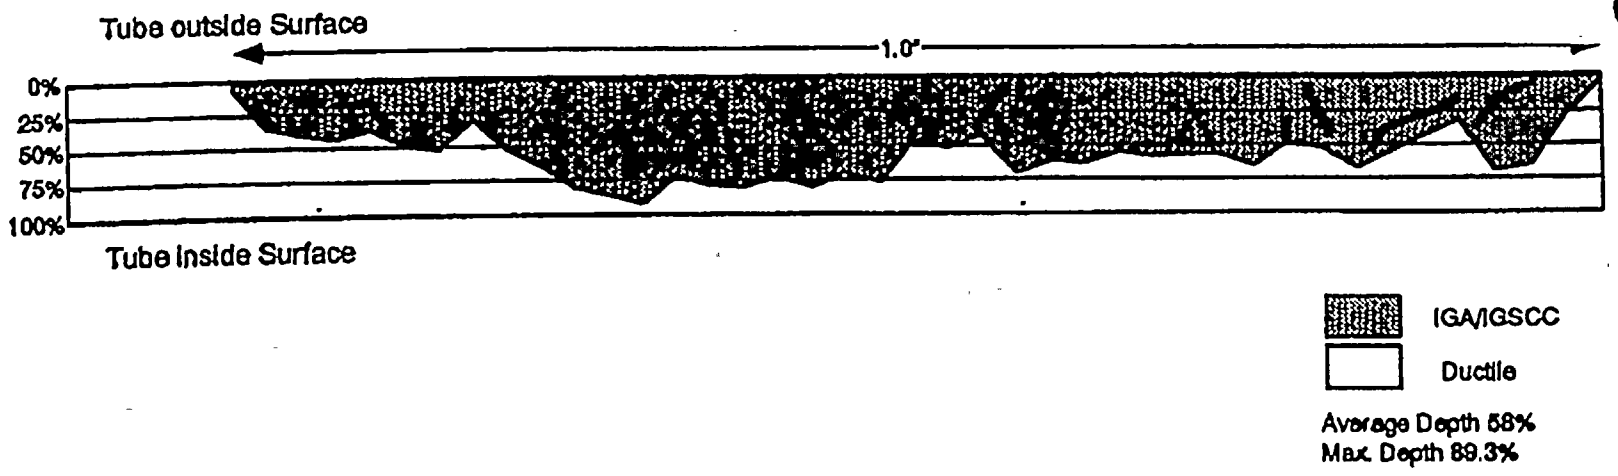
Steam Generator 22 Tube R127L140 Section 15 Burst Face Crack Depth Diagram.
